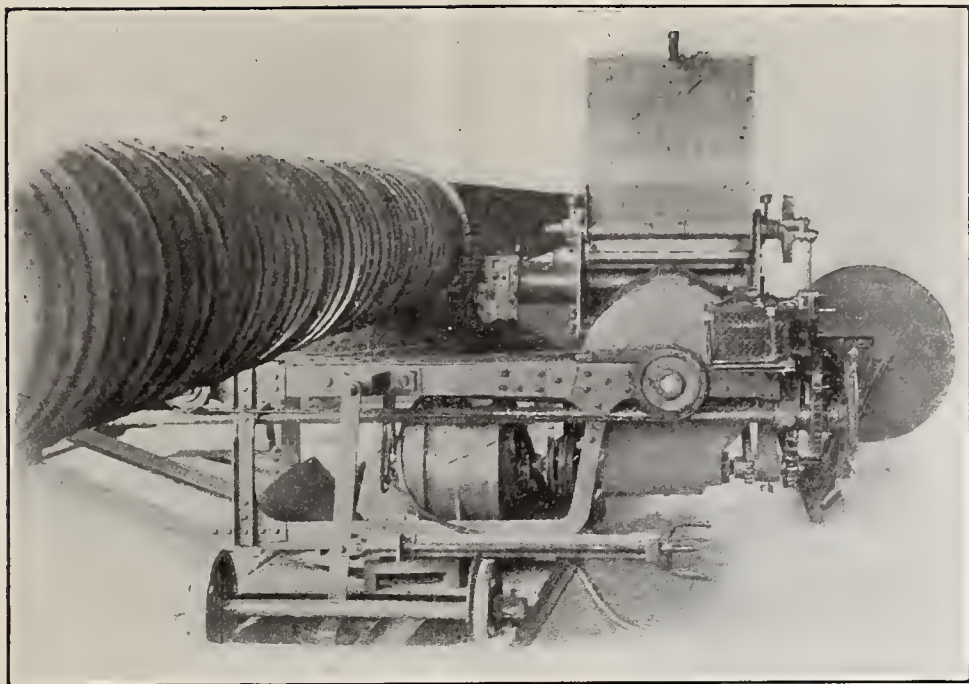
FRONT VIEW OF POLE-MAKING MACHINE.
